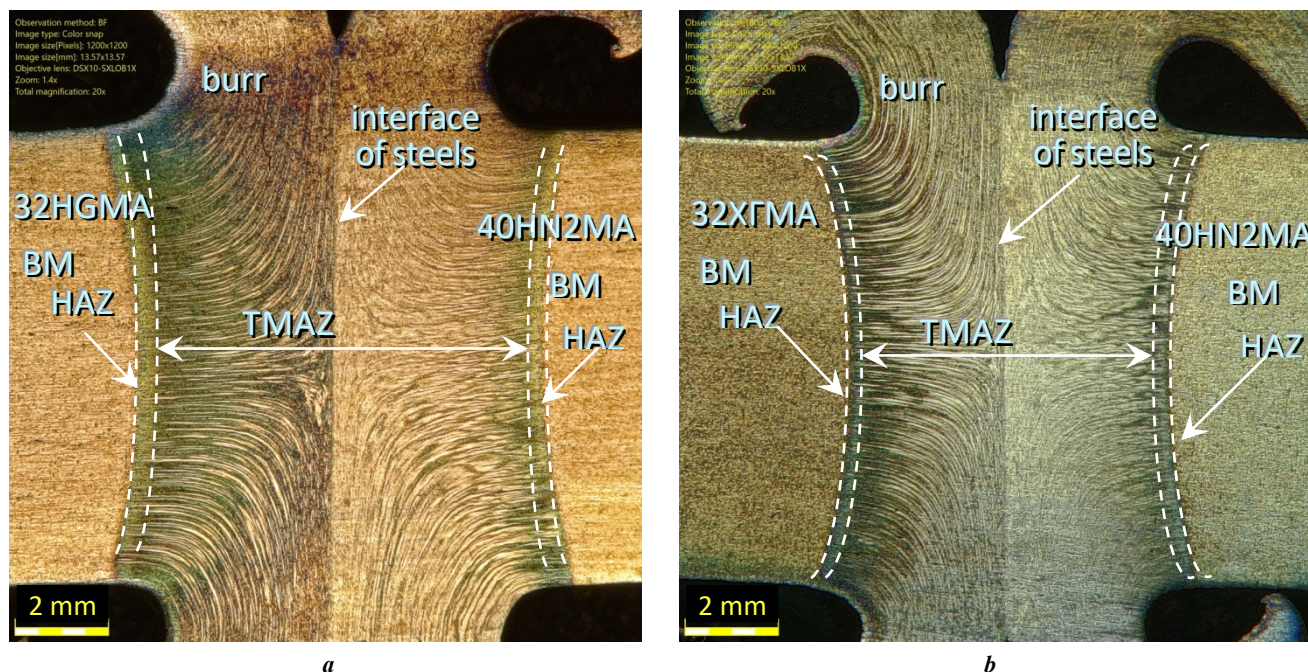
Macrostructure of welded joint of 32HGMA and 40HN2MA steels produced by rotary friction welding:
